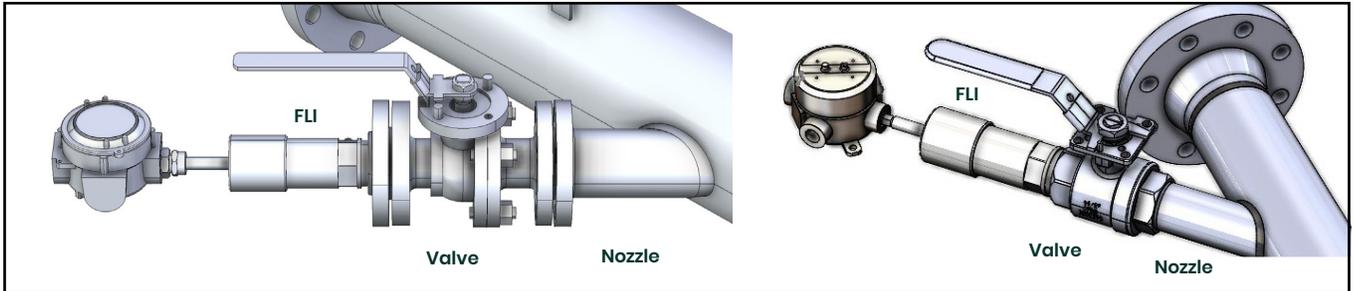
Nozzle installation with flanged (left) and threaded (right) configurations
